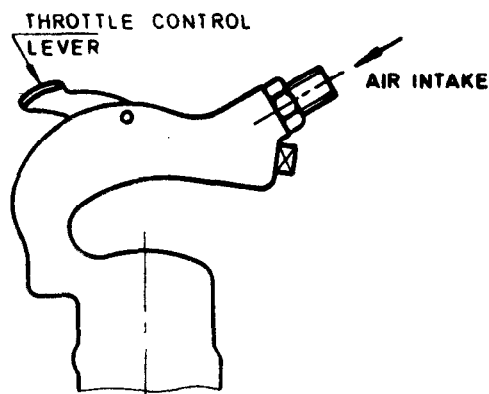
OPEN HANDLE WITH THUMB LEVER THROTTLE CONTROL, TYPE A
